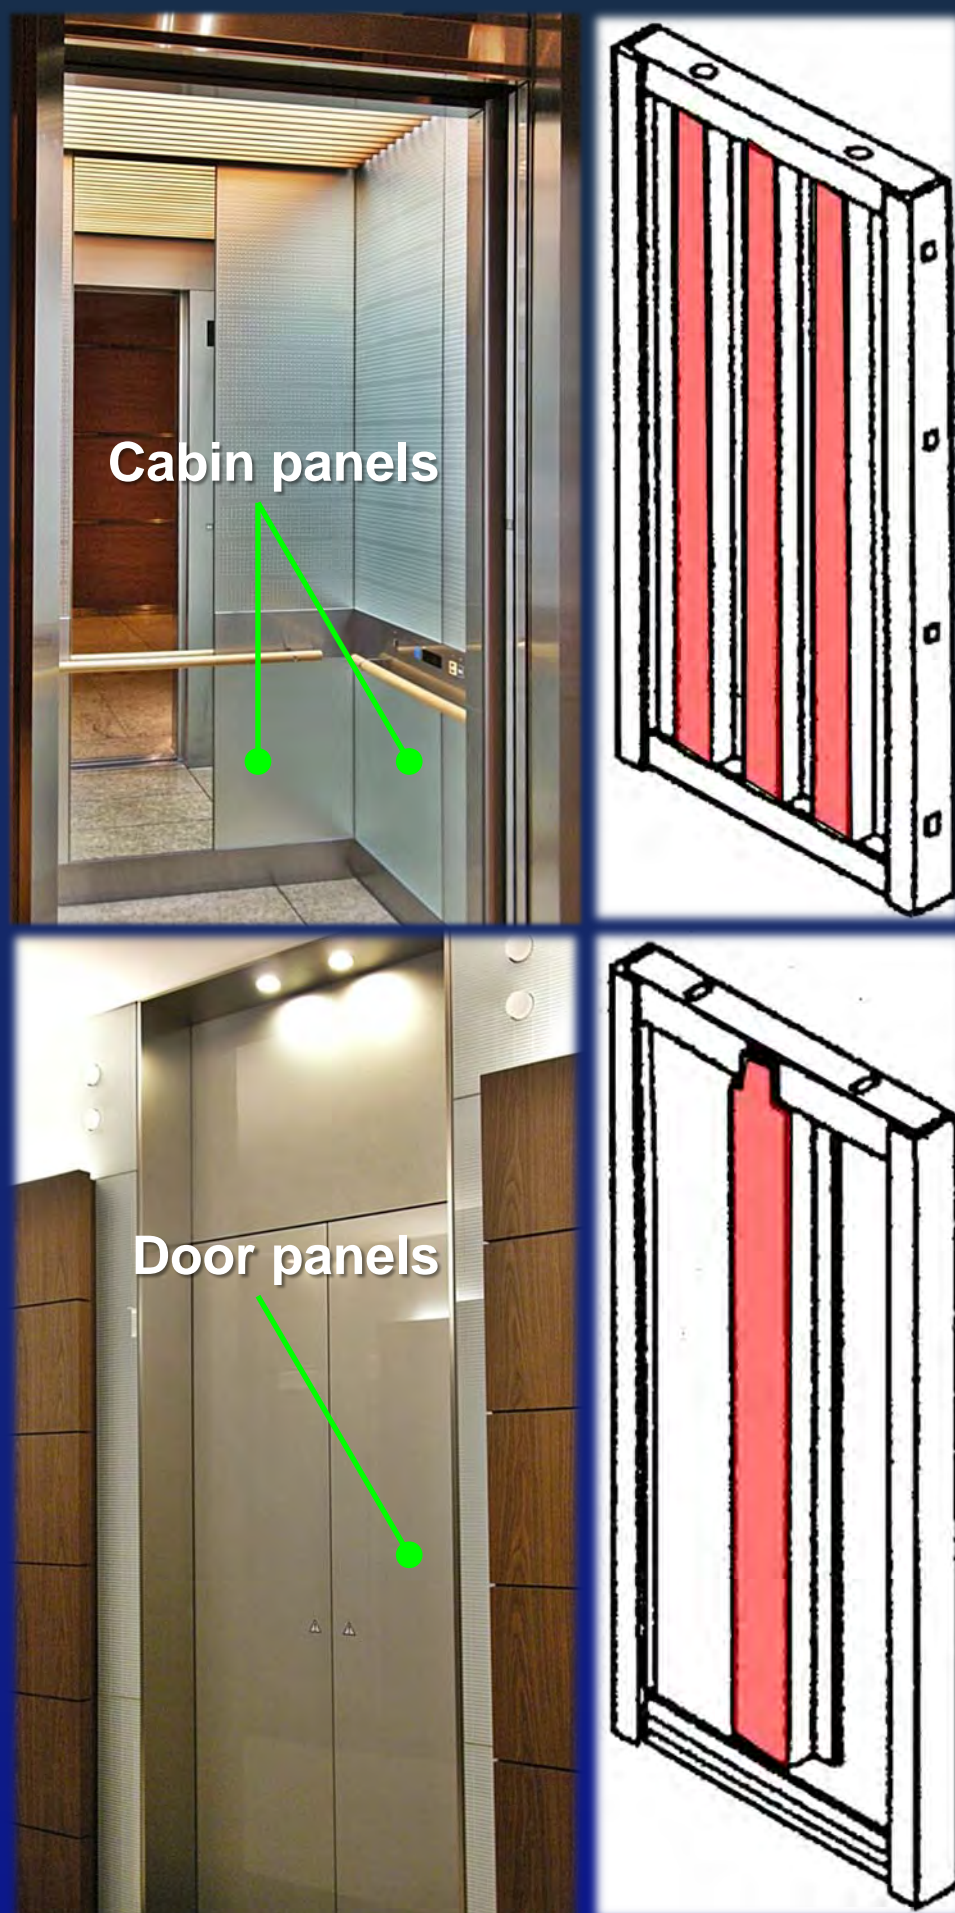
Adhesion of the reinforcement of an elevator panel and a door panel
